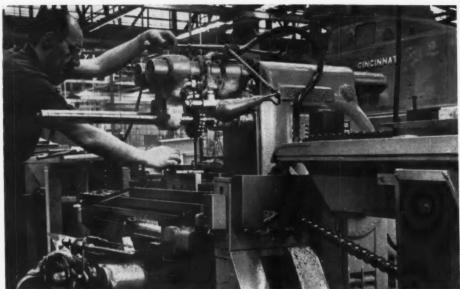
Rugged support is a requirement of the slip fixtures used in milling the stainless edge close-off sections.
